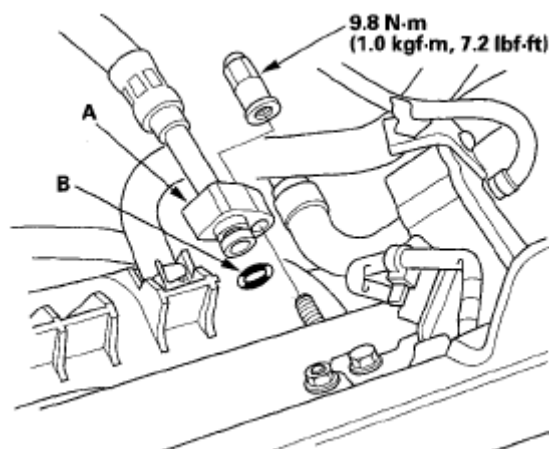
Identifying Fuel Feed Hose And O-Ring (With Torque Specifications)
